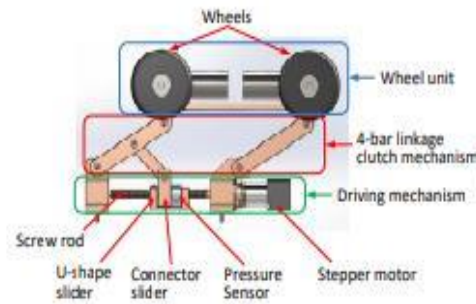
The Horizontal Mechanism of the Flexible Wheel Mechanism Drive in Pipe Robot
